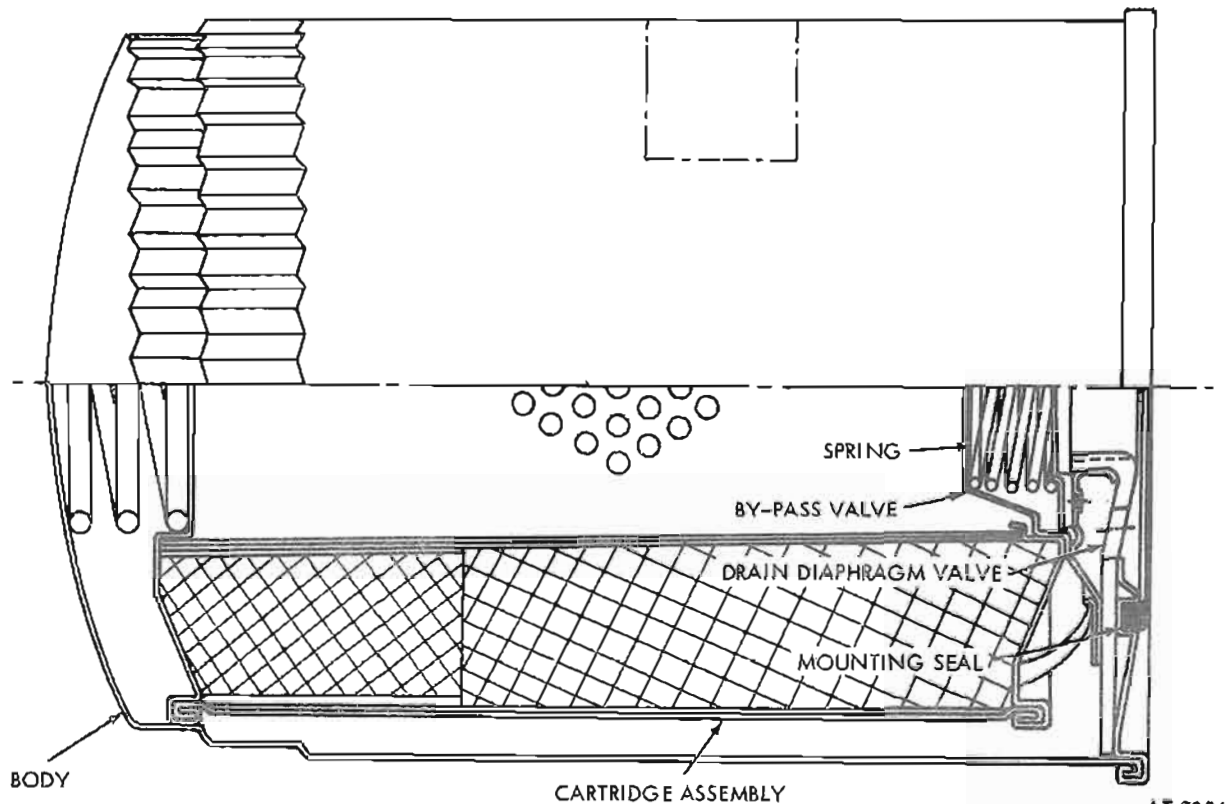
Oil filter assembly, full-flow disposable canister type—cutaway view.
